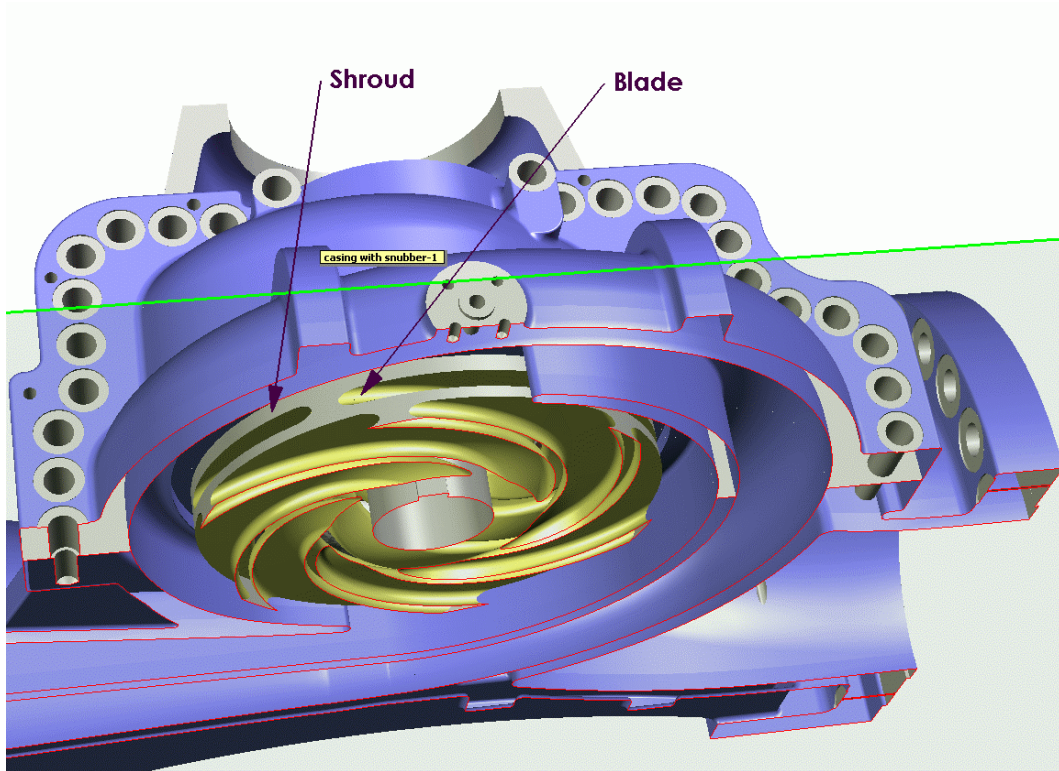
Pump section identifying the impeller transducer locations (Blade & Shroud)
